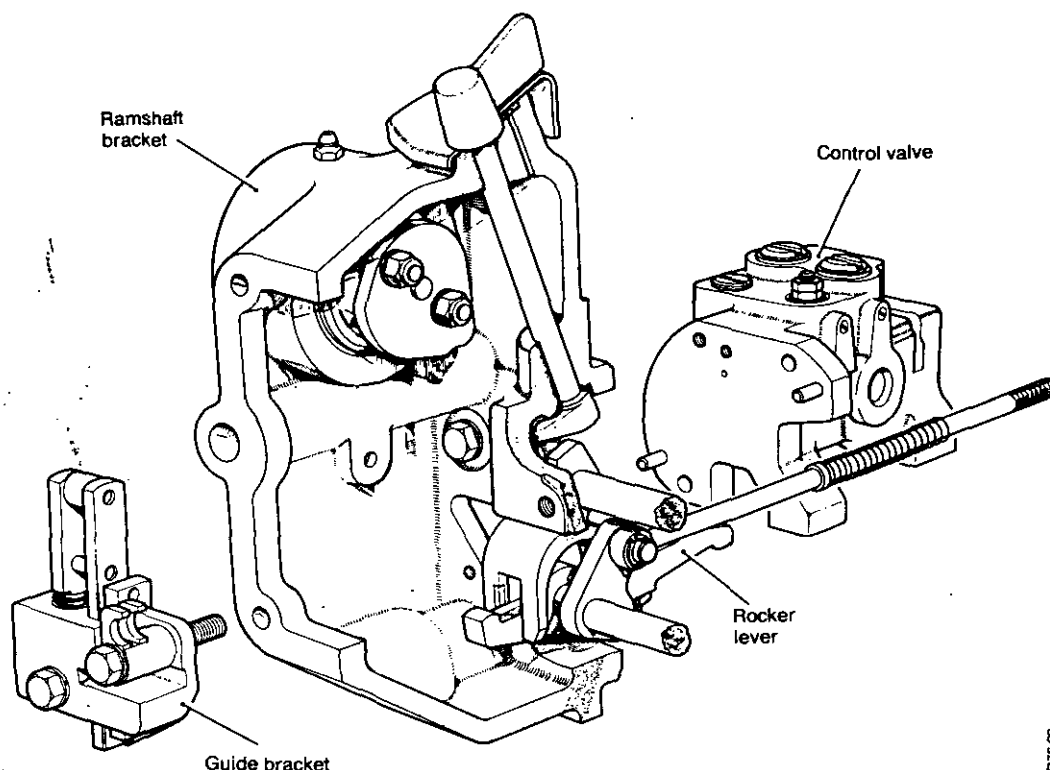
CONTROL VALVE AND RAMSHAFT BRACKET
